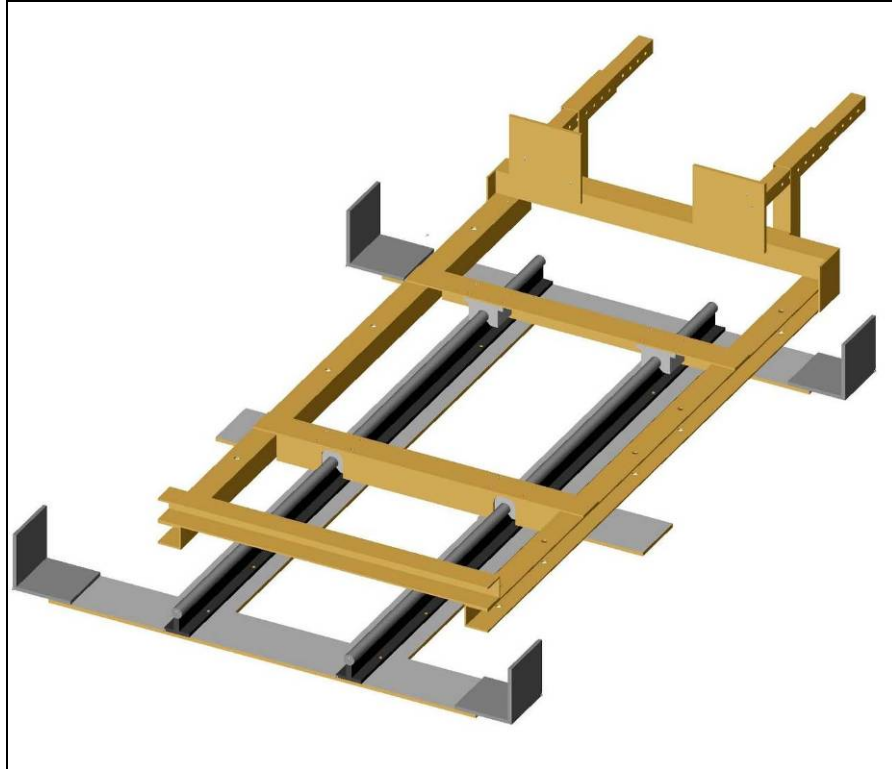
Full three-dimensional conceptualization of the backslider assembly for addition onto the centrifuge. The shoulder harness assembly is bolted to the slider frame with the shoulder pads inserted. The linear pillow-block bearings are attached to the slider frame and then attached to the precision linear rails. The rails are then attached to aluminum sheet stock for rigid attachment to the centrifuge structure. Not shown on here are: 1) the end-stop collars on the precision rails, 2) HDPE surface on top of the slider assembly, and 3) foam padding on the slider assembly and shoulder pads.
